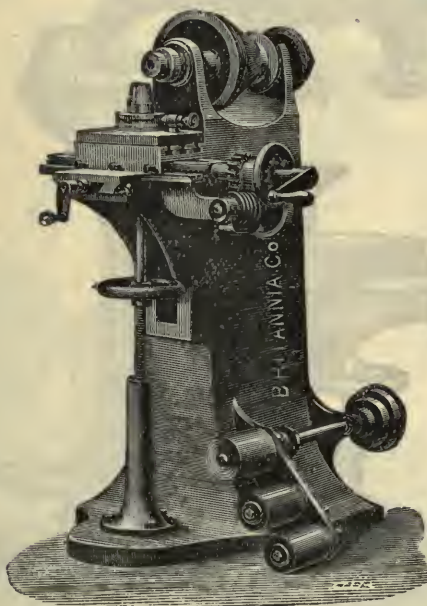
SINGLE-GEARED MILLING MACHINE.
